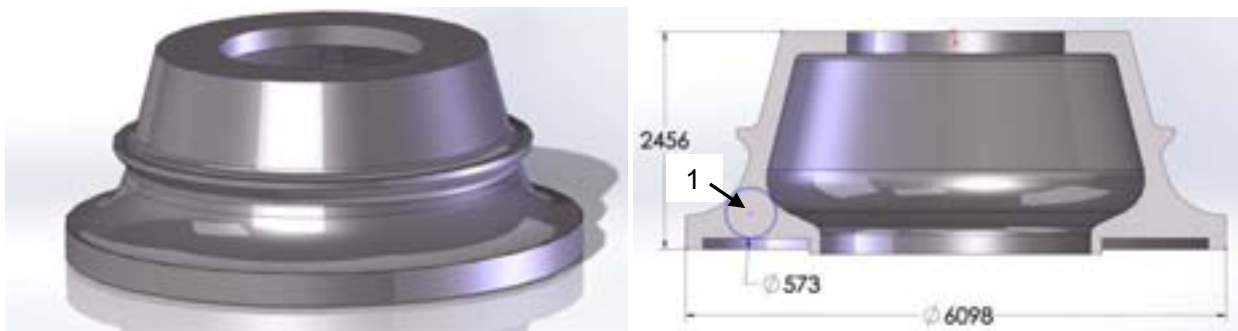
Geometry and dimensions of ductile iron grinding table (dimensions in mm)
